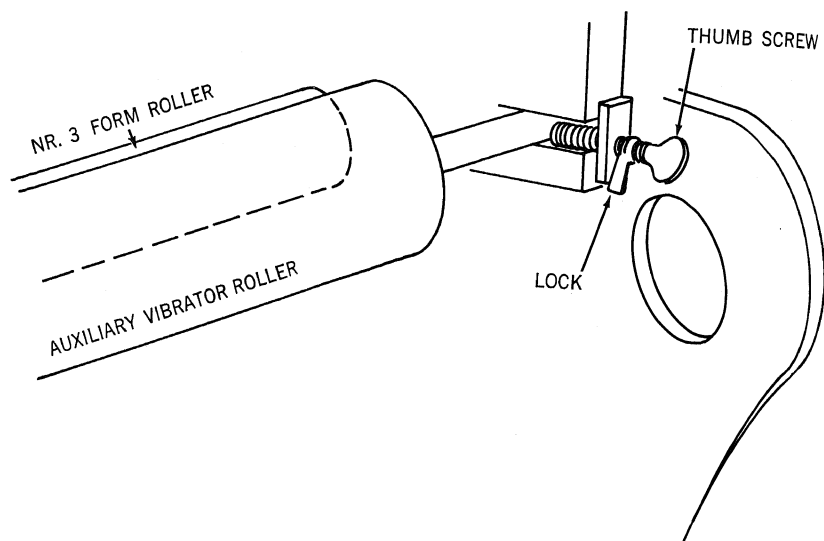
Setting auxiliary vibrator roller—ATF Model DP.
